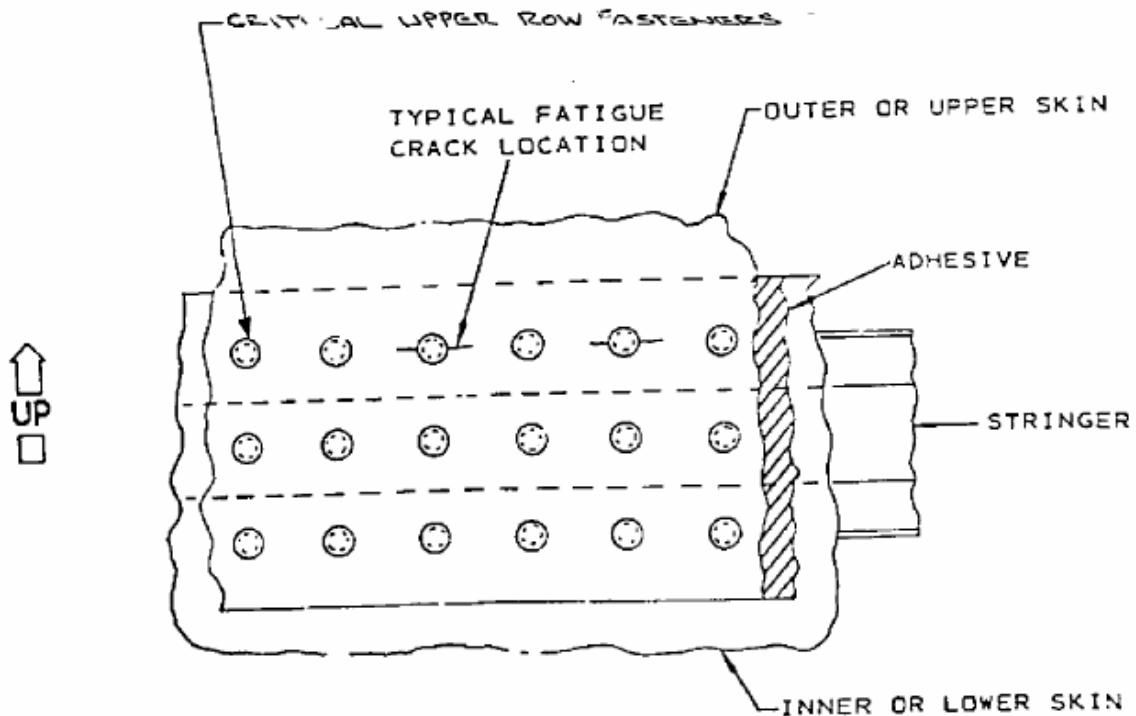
Schematic of typical cracking found in the upper skin, upper row of fasteners of longitudinal lap joints. No cracking was noted by external detailed visual or external HFEC inspections.
